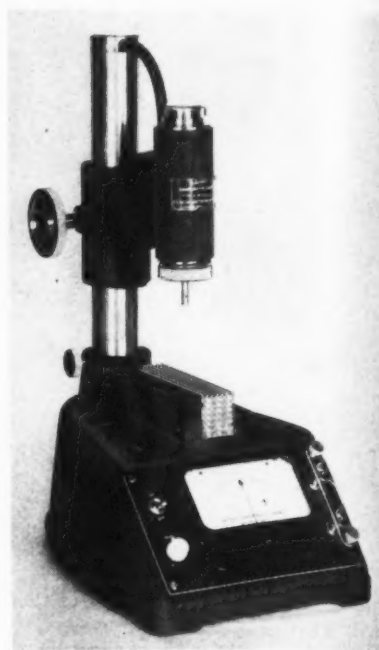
Fellows Cone-point Testing Fixture for Checking Concentricity of External Spur and Helical Gears
